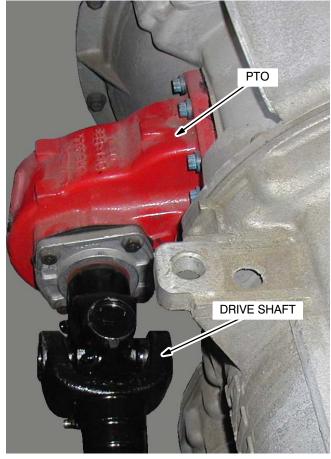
TYPICAL PTO AND DRIVE SHAFT
